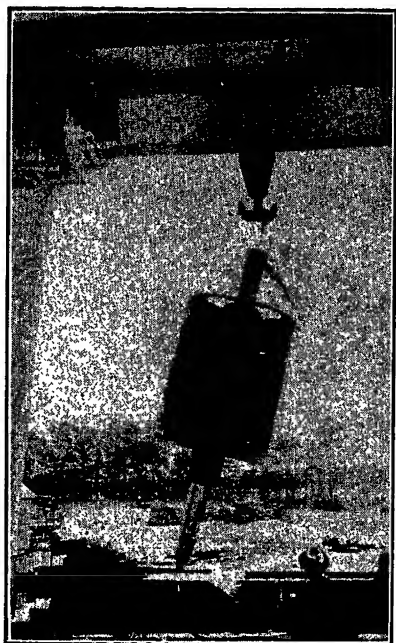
UP-ENDING AND LIFTING OF ROTOR FROM RAILROAD CAR
